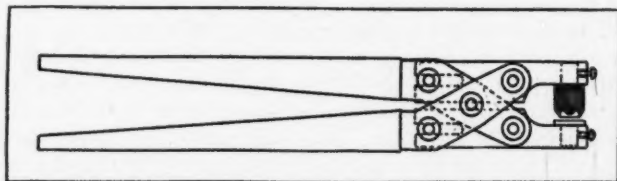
Punch for cutting samples from plasticised sheet. Side view (die in cross-section). Diameter of cutting die, 12 mm.
